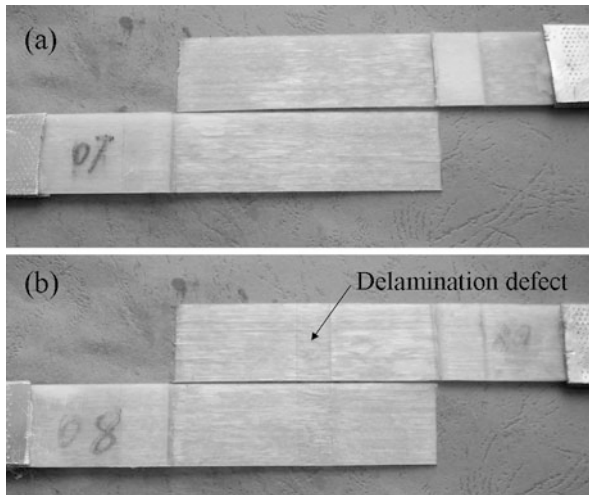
Photograph of the fractured specimens without defects (a) and with typical delamination defects (b)
